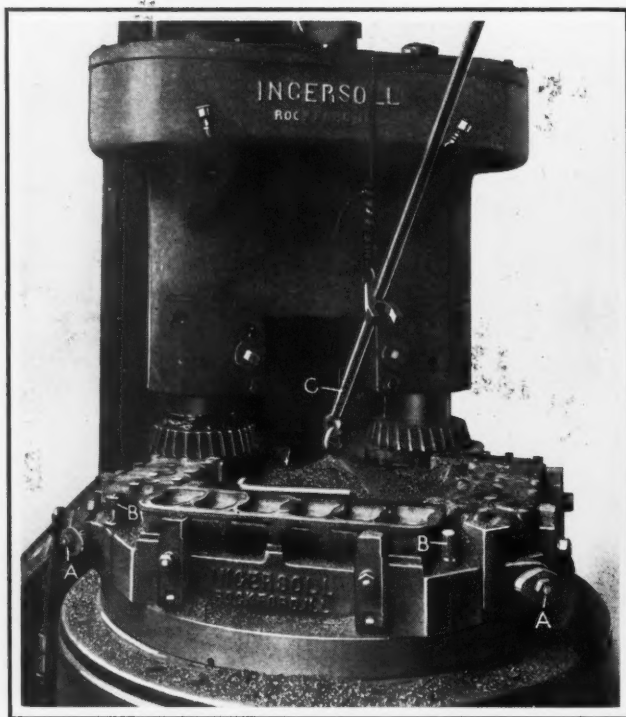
Rough- and finish-milling the Top and Bottom of Cylinder Heads in a Continuous Rotary Machine
